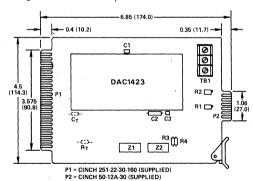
AC1582 Mounting Card. Dimensions shown in inches and (mm).
